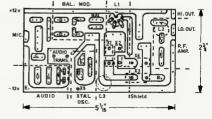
PRINTED CIRCUIT BOARD LAYOUT.
